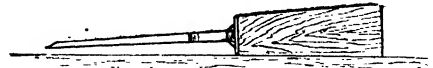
Getting Chisel Handle in Alignment with Blade.
